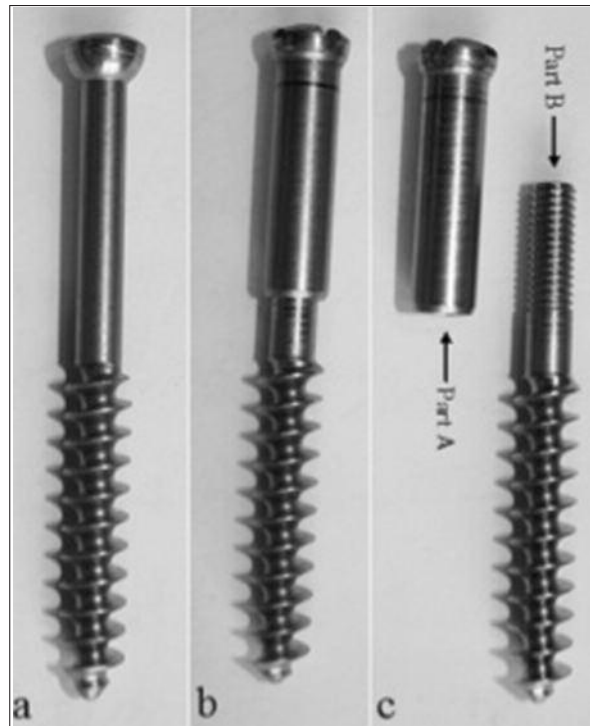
Photographs showing two screws used: (A) The AO lag screw: total length, 65 mm; thread diameter and length, 6.5 mm and 32 mm respectively; shank diameter and length, 4.5 mm and 28.4 mm respectively. (B) The combined lag screw: total length, 65 mm; thread diameter and length, 6.5 mm and 32 mm respectively; shank length, 28.4 mm. (C) The combined lag screw shank consisting of Part A and Part B. Part A was a hollow cylinder construct and contiguous to the head (the outer diameter, 6.5 mm), containing fine threads (thread pitch: 0.85 mm) in the hollow. Part B was a cylinder construct and contiguous to the thread (the outer diameter, 4.5 mm), containing the identical fine threads on the inner surface.
